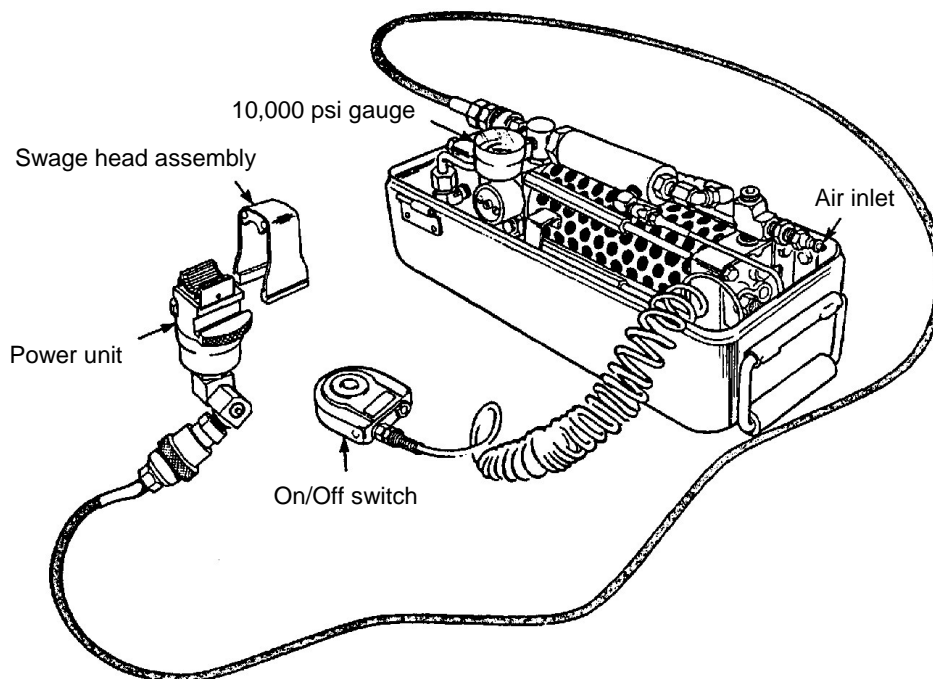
Designed Metal Connections (Deutsch DMC) DLT Swaging Kit Assembly
